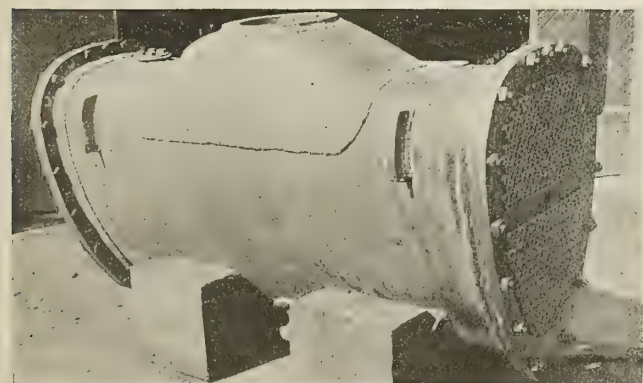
Destroyer Condenser Electric Welded
